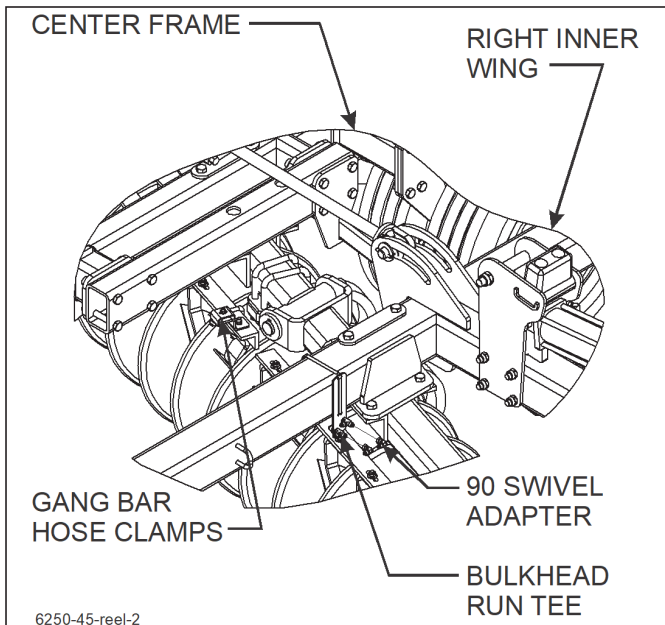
Finishing Conditioner Reel Installation Hydraulic Hose Placement (Right Half)
